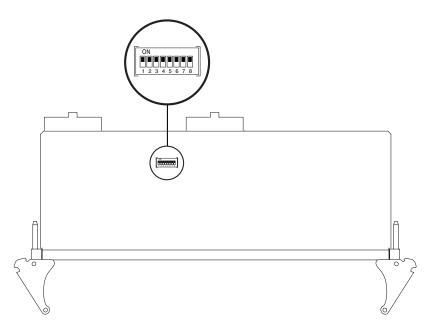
S1302 DIP Switch Bank Location on the Solder Side of the RTM-S
